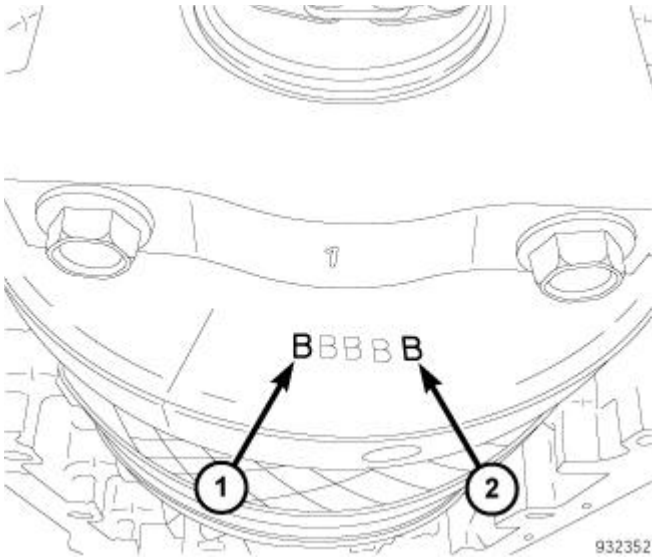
Crankshaft Counterweight Stamped Grade Identification Marks
